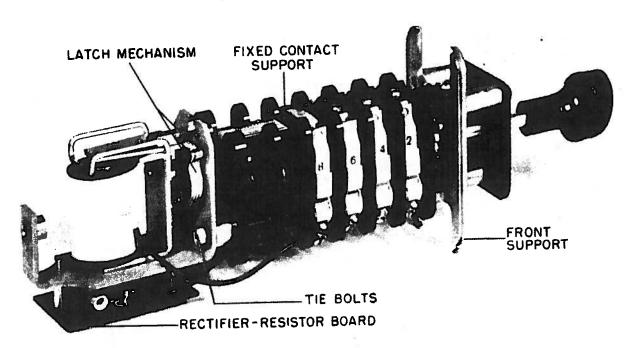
A (8028243) Type HEA62 with Diode-Resistor Board
